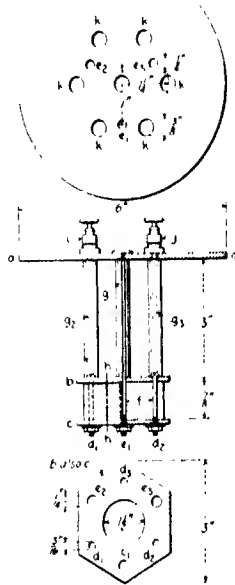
Heating Coil for K. & S. Fusing-Point Tester.
